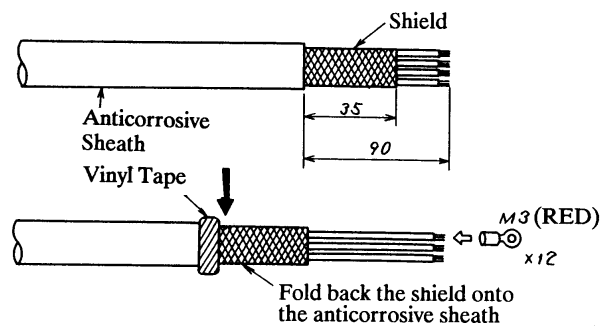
Fabricating cable connected to terminal board TB-D1 in Raise/Lower Control Box
